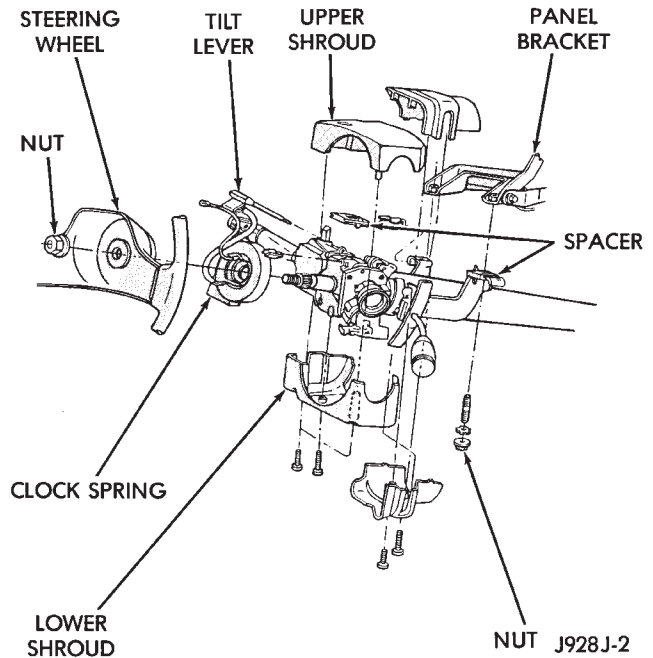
Steering Column Shrouds Remove/Install - Typical
